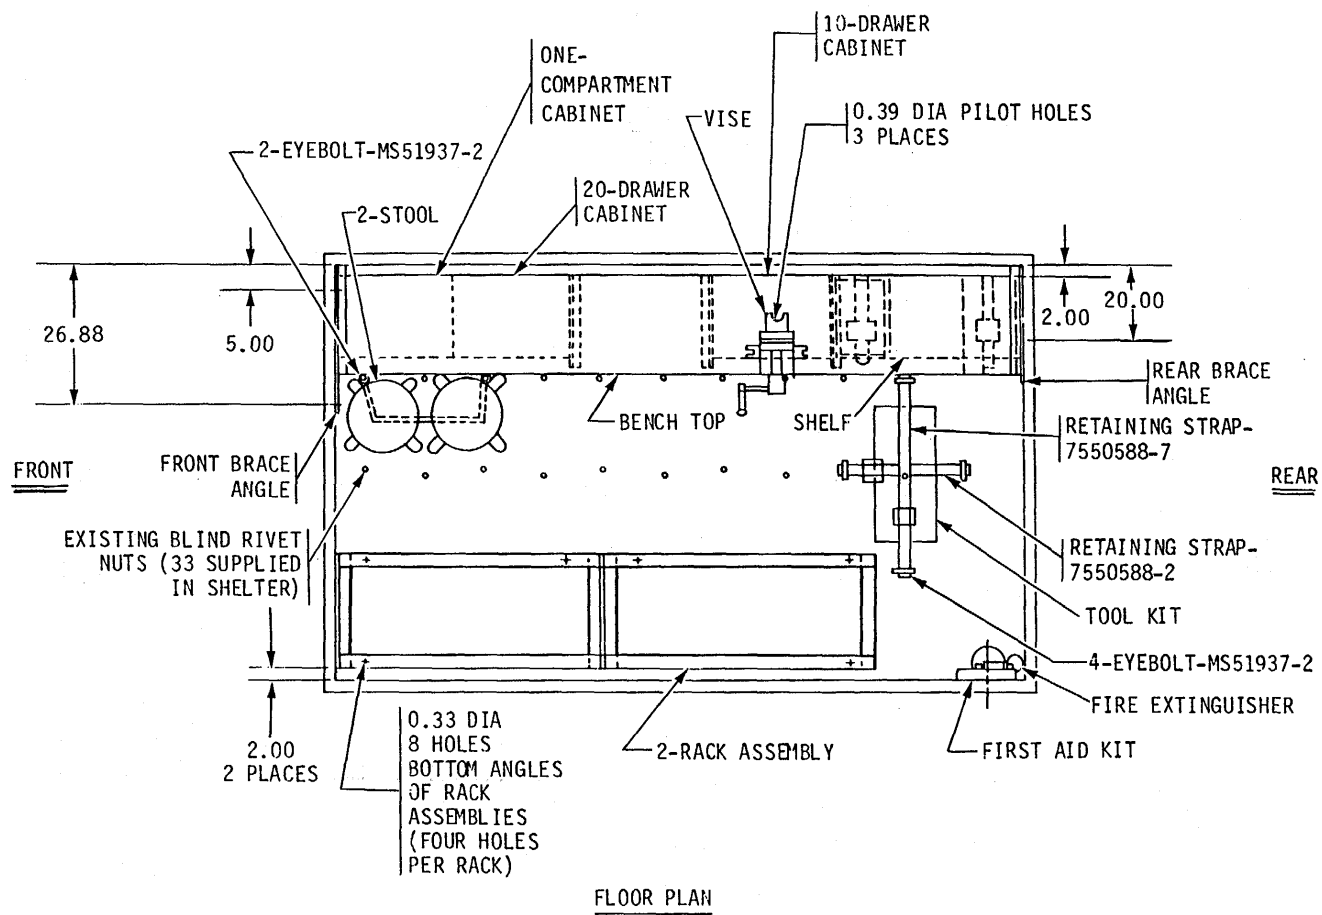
Components to be Mounted, Floor Plan, Unit 1, 280.
